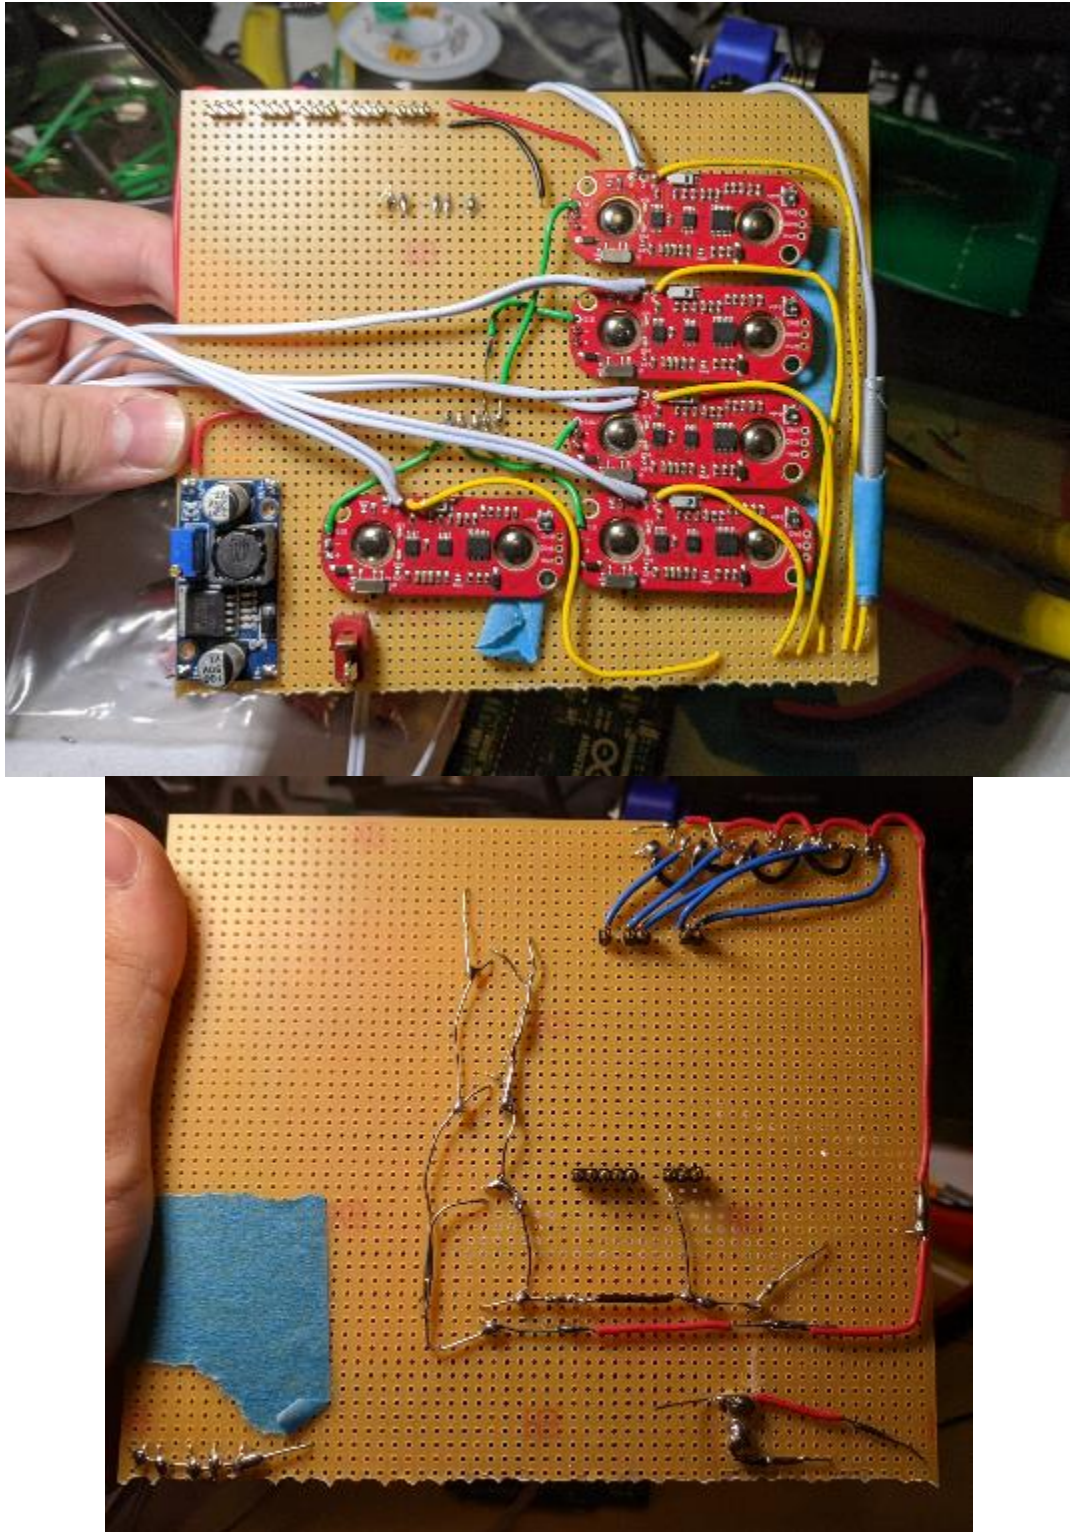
(a) Front of the circuit on a perforated board (b) Back of the board.
